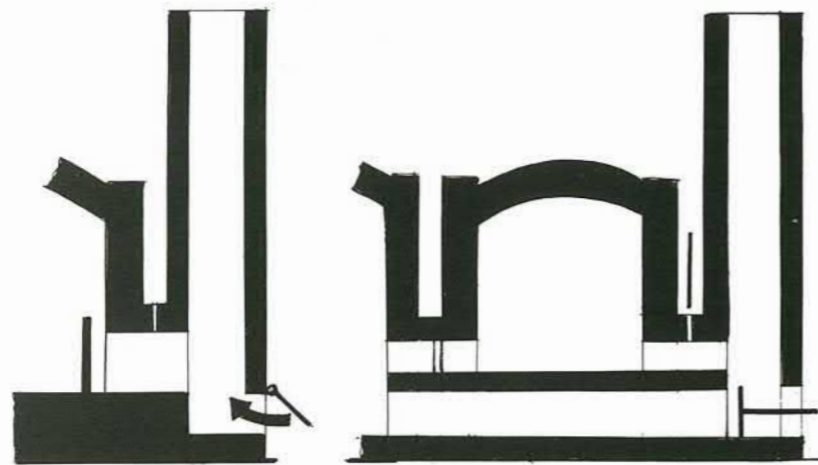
Left, draft control door on stack. The low wall in the chamber is placed to stop heat loss by radiation. Right, biscuit chamber by-pass arrangements. Steel damper plates can be used on the outlet side, but a refractory slab will be needed on the inlet port.
